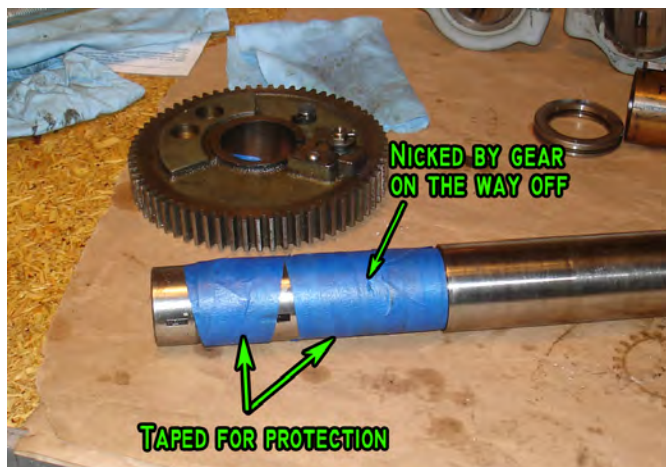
Tape the rear bearing area of the spindle to protect it in case the bull gear strikes it during removal (as it did in this case).
